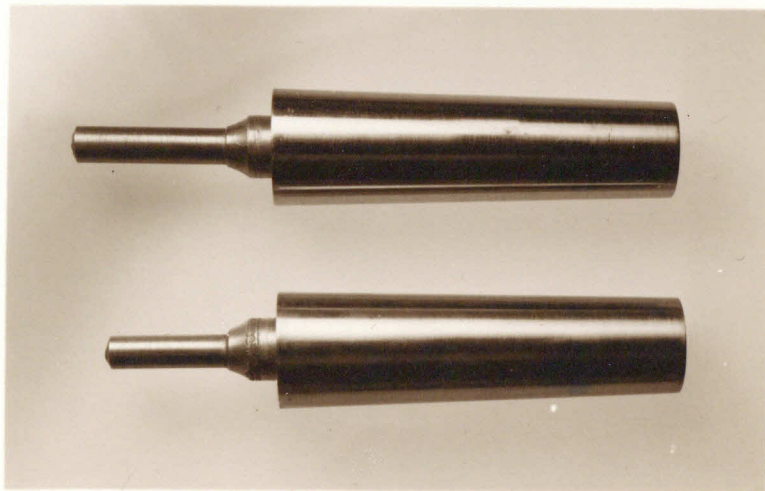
Lathe Taper Adapters with Specimen Halves.
